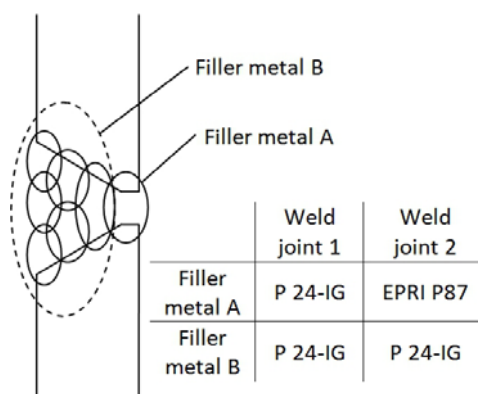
Scheme of weld joint and welding technology configurations
